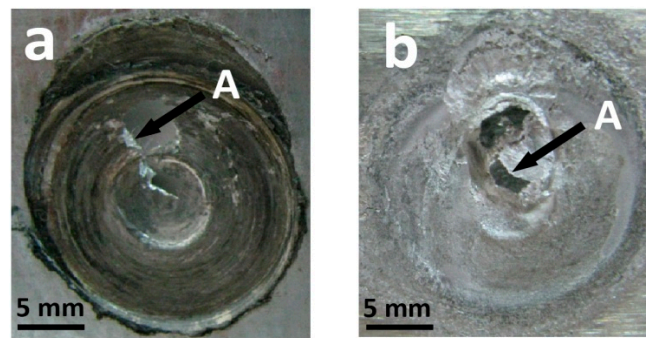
The macro-morphology of tensile fracture surface: (a) side of iron; (b) side of Mg.
